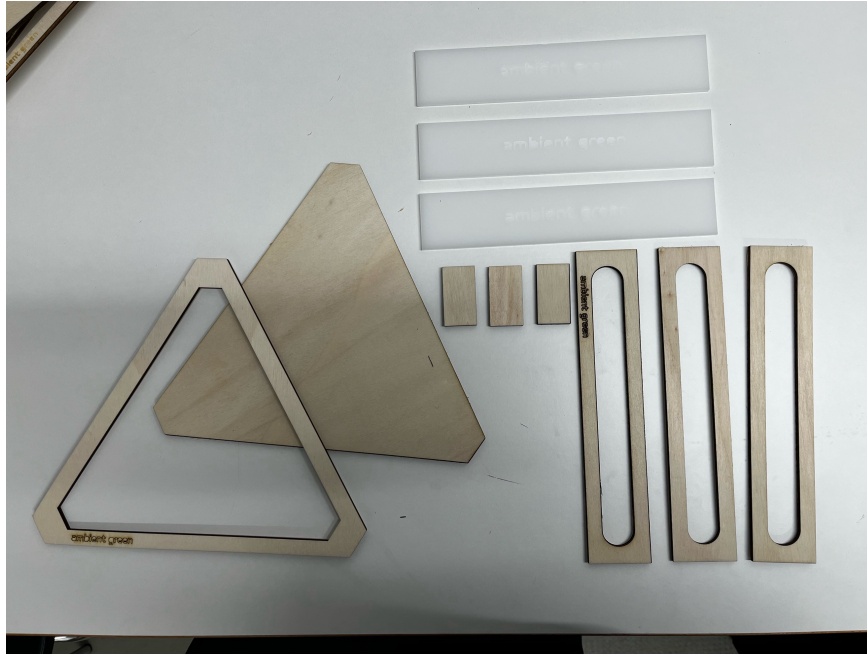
Plywood cladding and acrylic glass parts before assembly
